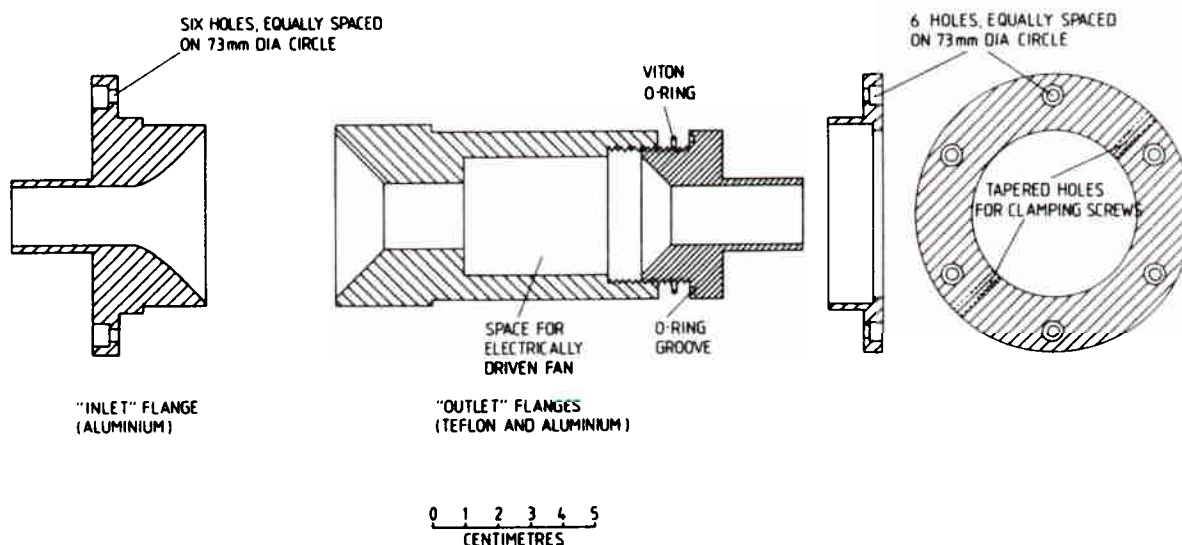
Cross-sectional views of "inlet" and "outlet" flanges.
